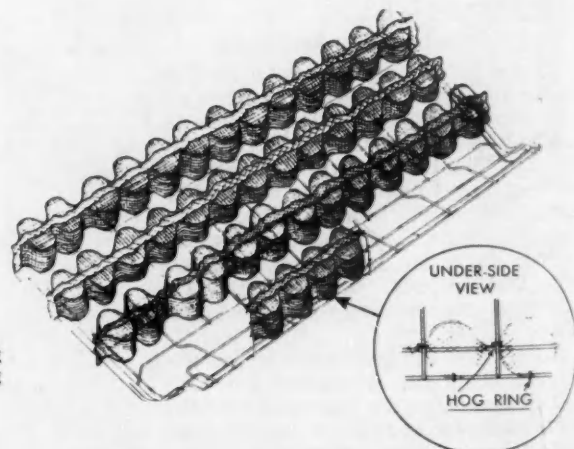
Tying each coil spring to the bottom frame with hog rings keeps them in place
